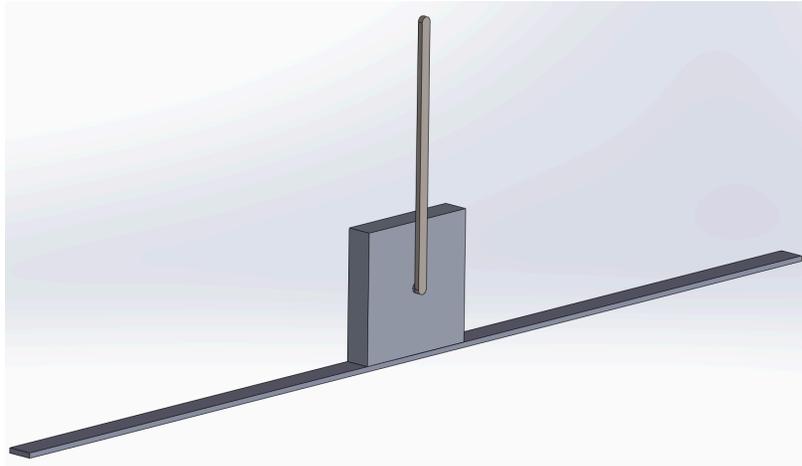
SOLIDWORKS CAD model of the pendulum cart assembly
